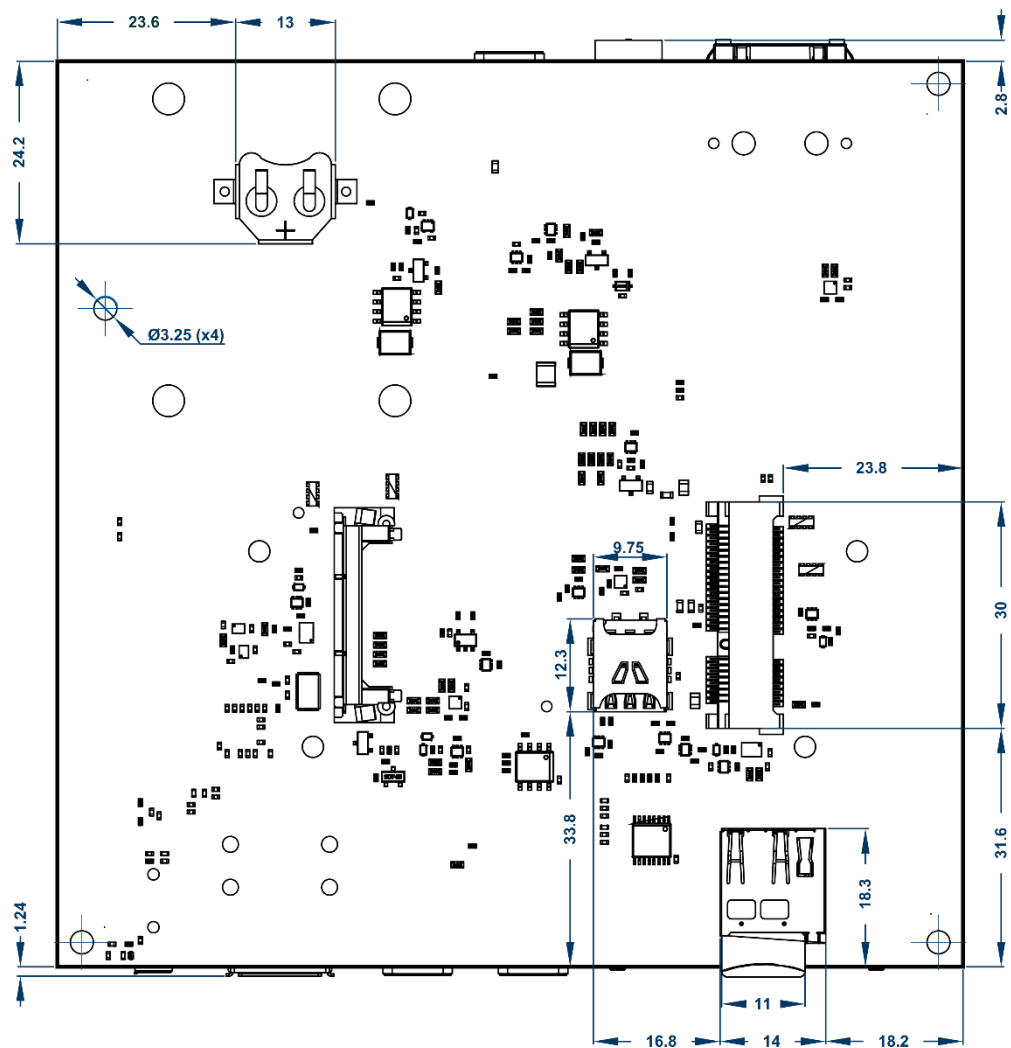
Dahlia Carrier Board Dimensions (in millimeters) – Bottom Side
